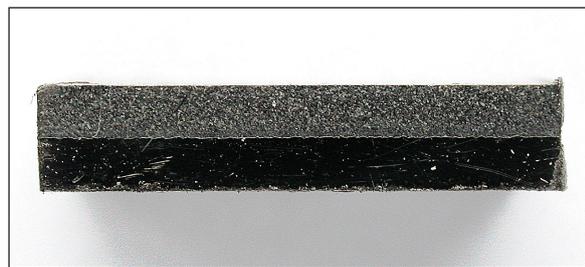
Cross-section of the explosion welded joint (top layer – Ti, bottom layer – Ni)
